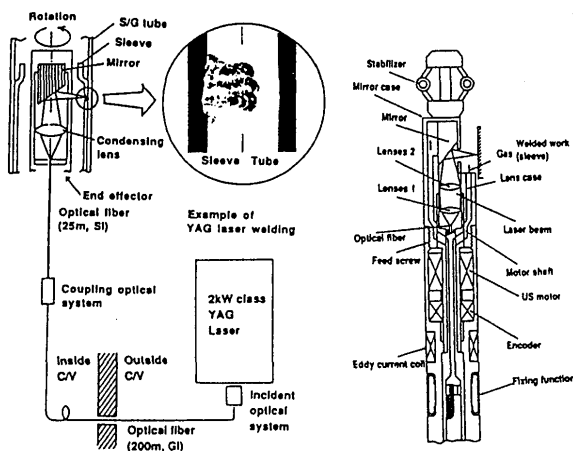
YAG laser repair welding of steam generator of nuclear power plant [3.7]
